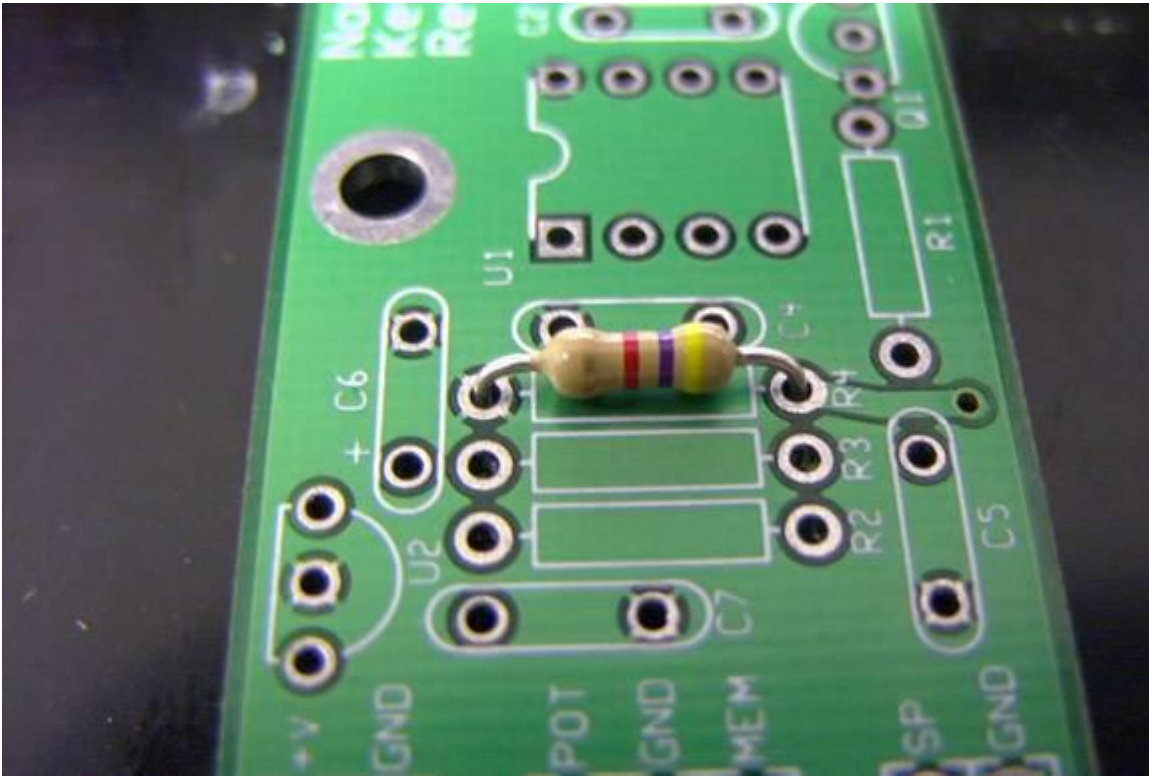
Resistor in place ready to solder. Notice how nicely it fits? You can do it too! You will be amazed when you find out how easily it is done. I usually bend the leads on the back side of the board at a 45 degree angle to hold the resistor in place so that it doesn't fall out when I turn the board over to solder. ©
